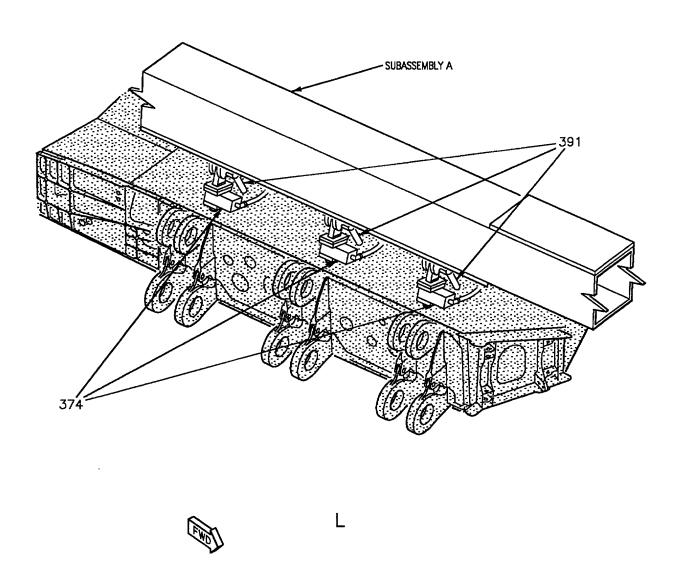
Inner Wing Attach Lugs (Sheet 6)
